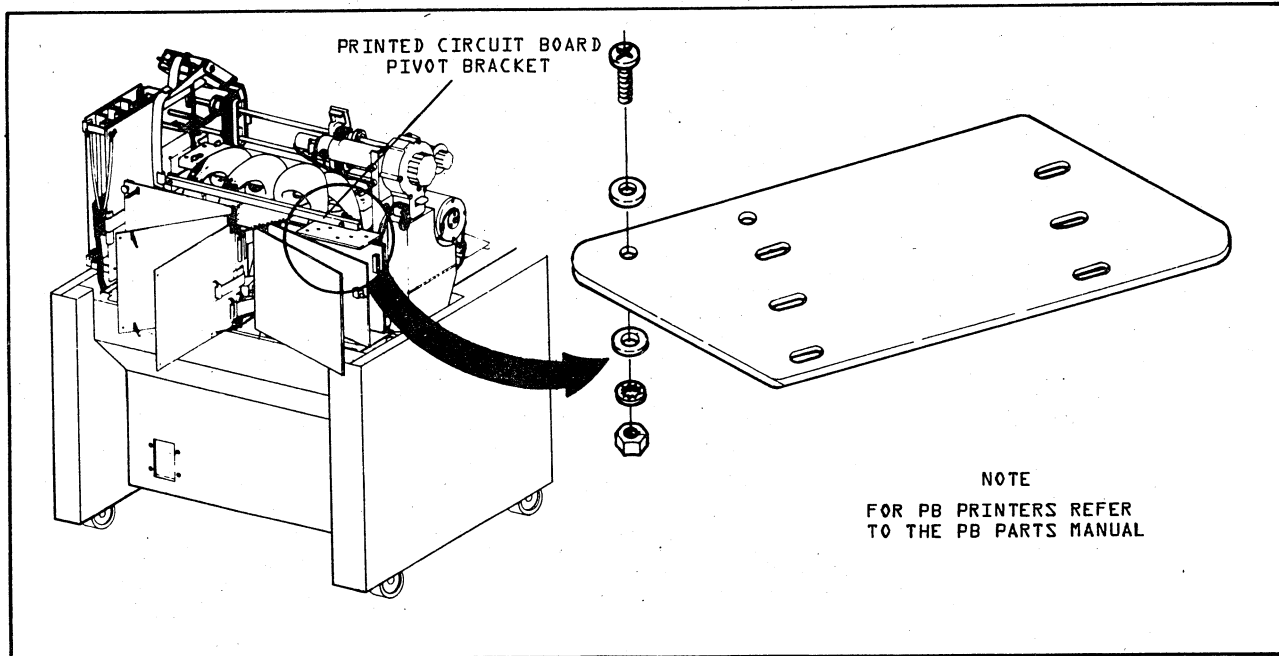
INTERFACE MOUNTING PLATE INSTALLATION
